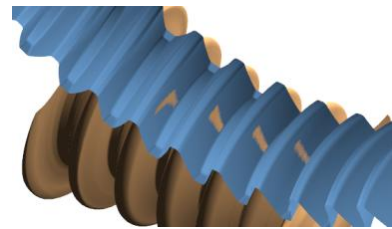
[44]SS-Worm gear (drum shape worm gear)
